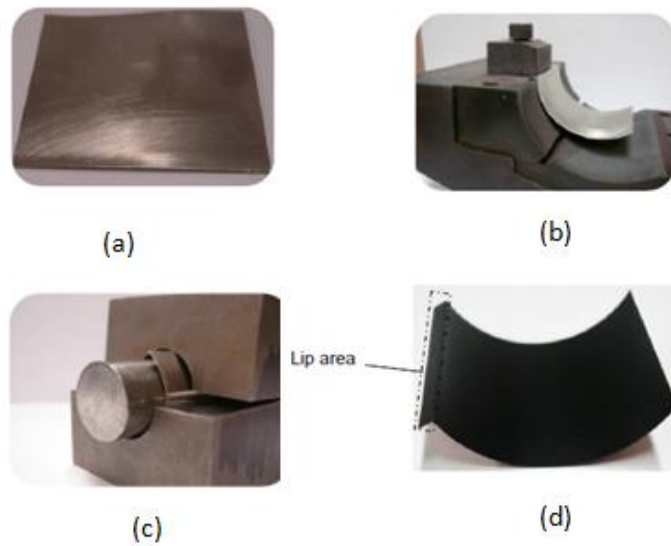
Top foil formation (a) Inconel Blank (b) Lip forming jig (c) Curvature forming jig (d)Coated top foil
